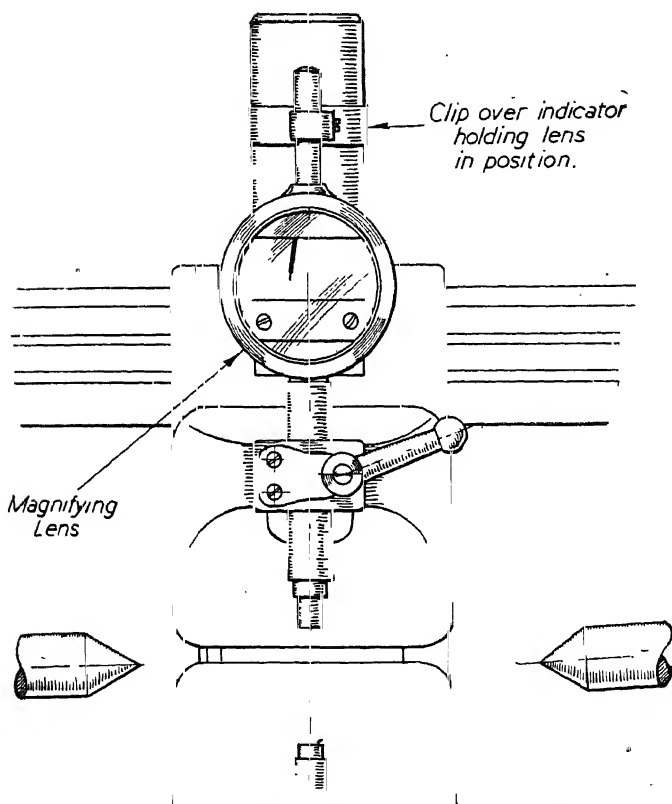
Showing magnifying lens held in position by a spring clip for increased accuracy of indicator readings.
